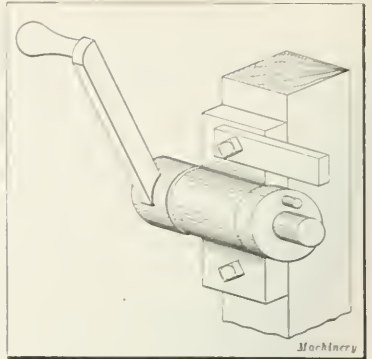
Hand Bending Fixture used for making Pieces shown at A in Fig. 1
